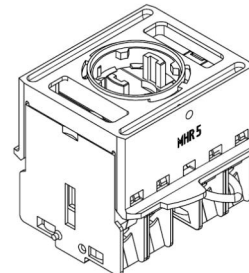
Assembly of MTZU_564 + MTZU_564 to the module holder MHR_5
